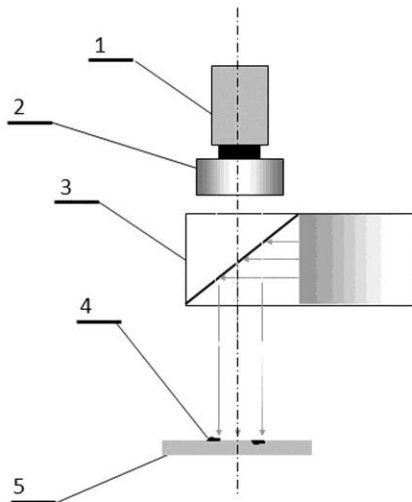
A new camera based machine vision system for the automatic inspection of surface defects
